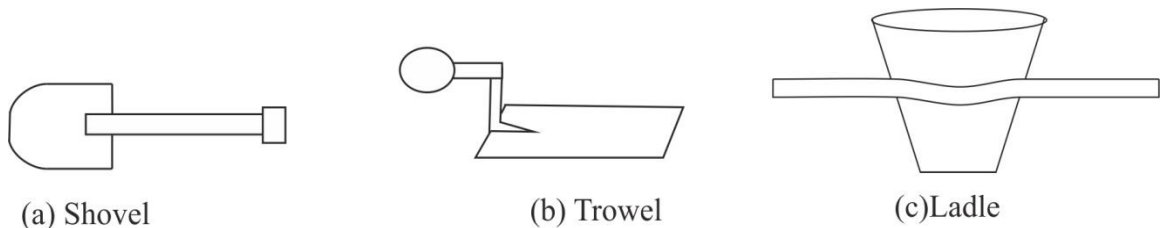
Moulding tools; Shovel; Trowel and ladle
